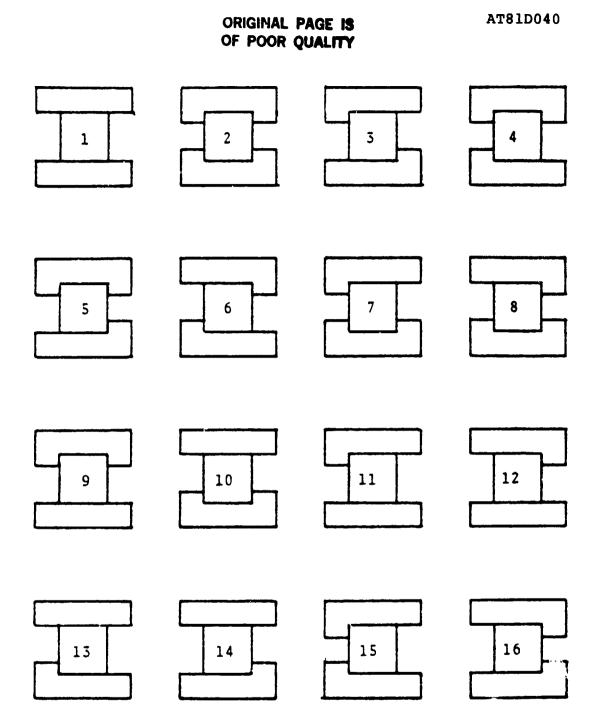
CYLINDRICAL ROLLER BEARING
